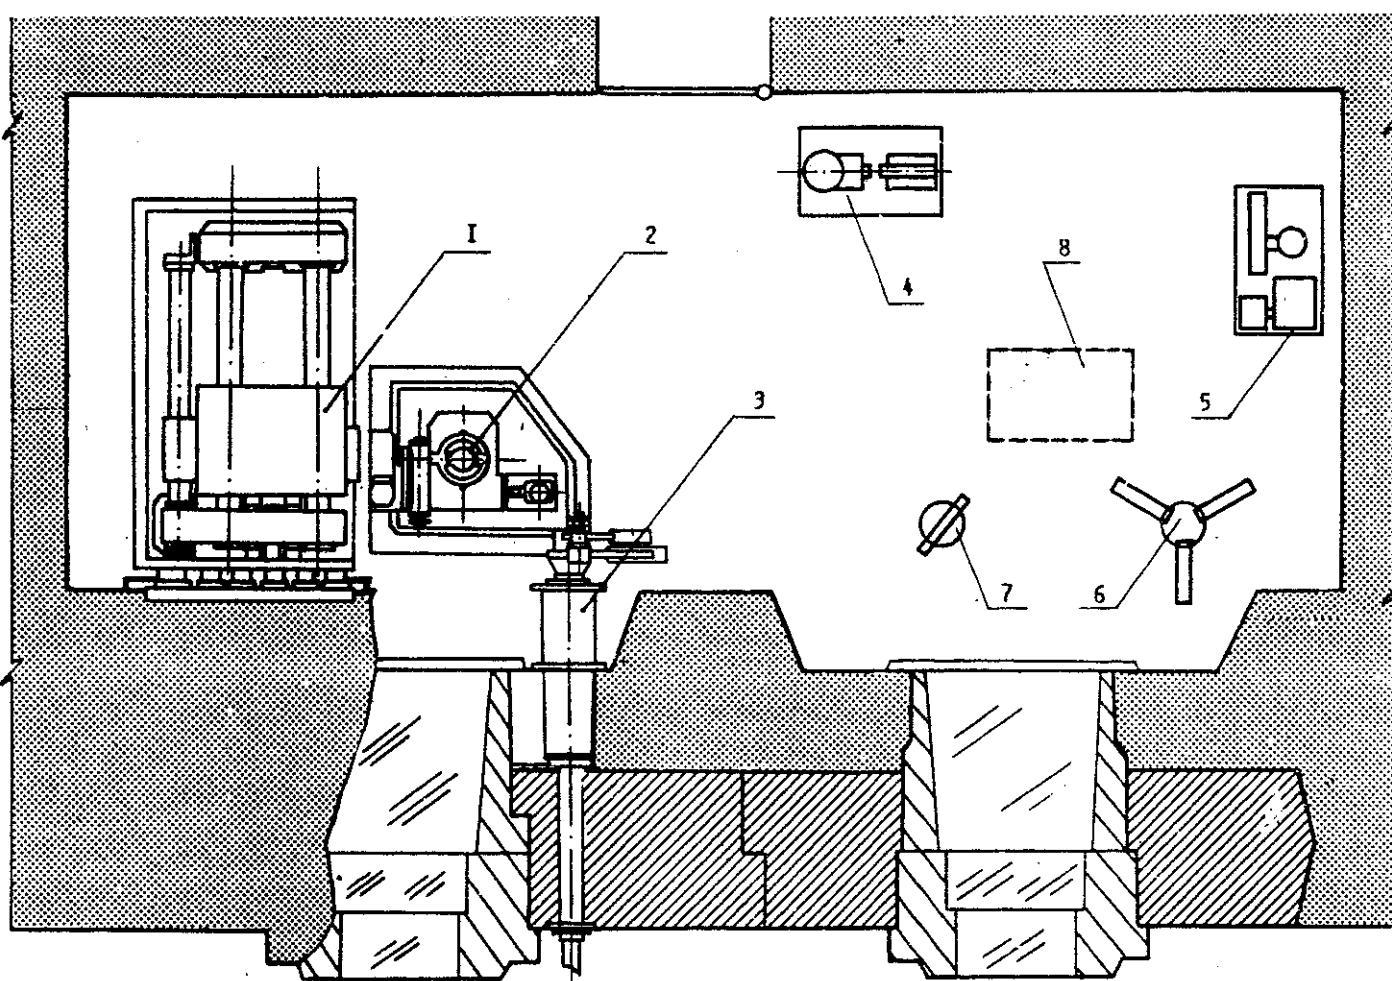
Complex of facilities for fuel elements refabrication: 1- FE cutting machine; 2 - clamping unit; 3 - screwdriver; 4 - fuel removal unit ; 5 - facility for circumferential welding ; 6- facility for welding under pressure; 7 - tightness testing apparatus; 8 - the working position for mobile units
